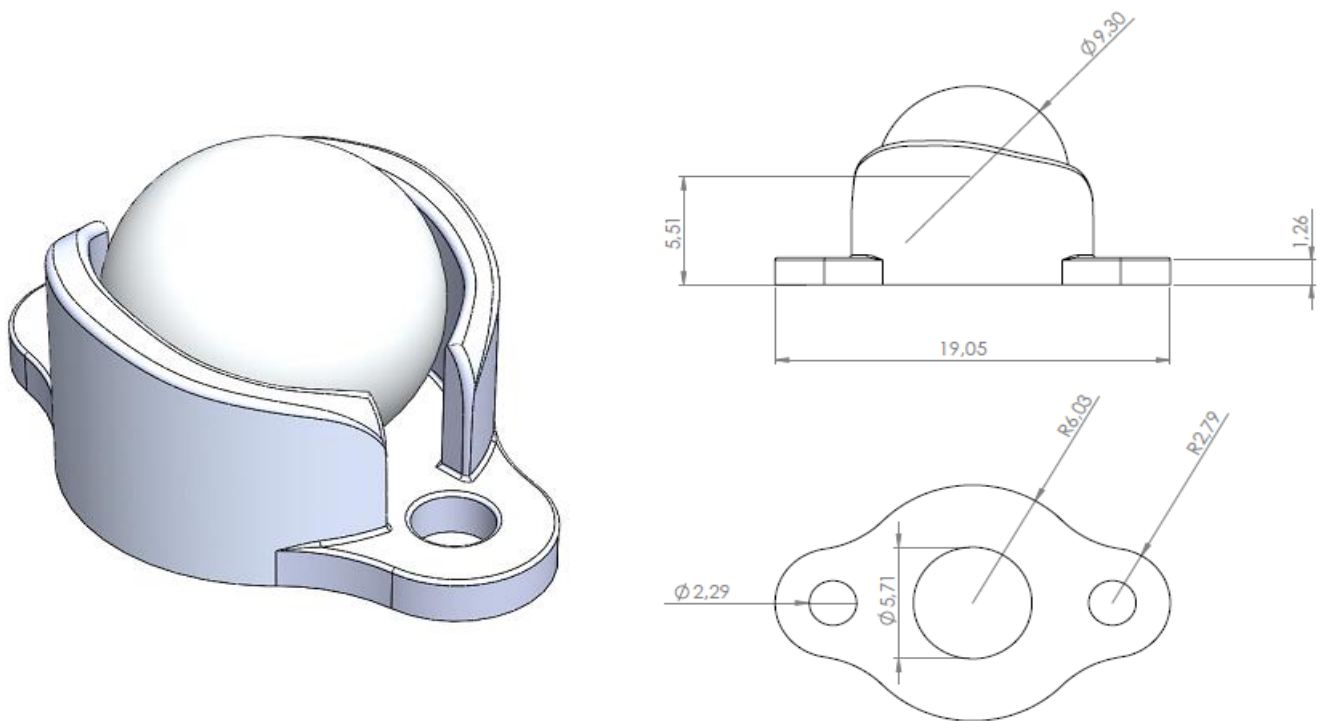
Technical Drawing and Trimetric Views of the Wheel
